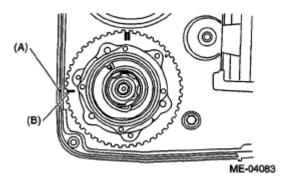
Identifying Mark On Crank Sprocket Courtesy of SUBARU OF AMERICA, INC.
